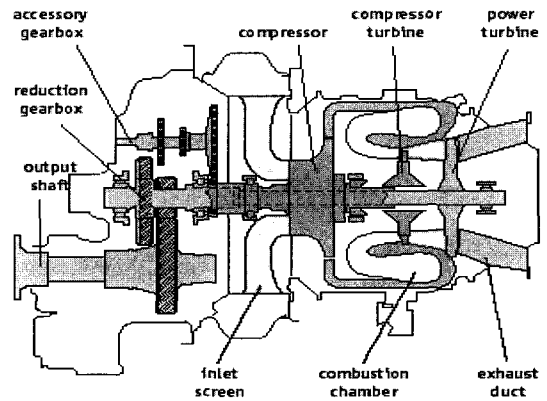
Engine schematic diagram of PW206C turbo shaft engine
